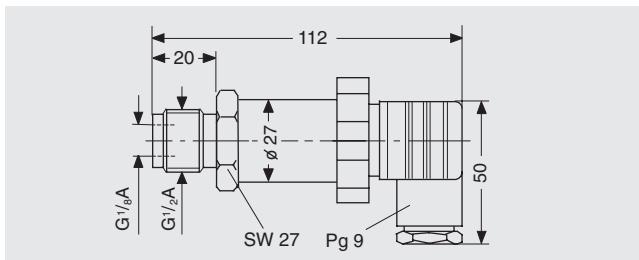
/165 Pressure transmitter 7MF1562, dimensions
